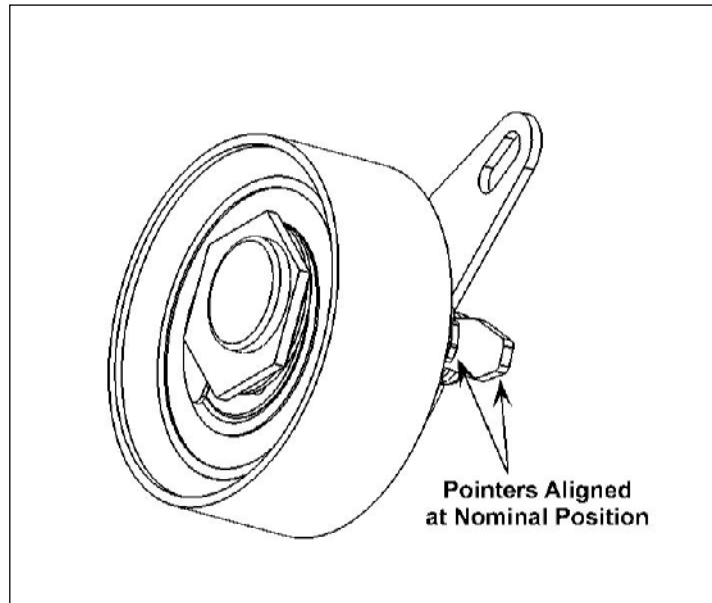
TBT Pointer Alignment for proper Layout Installation
